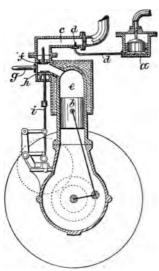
Milnes-Daimler light petrol van. Sectional view of engine.
